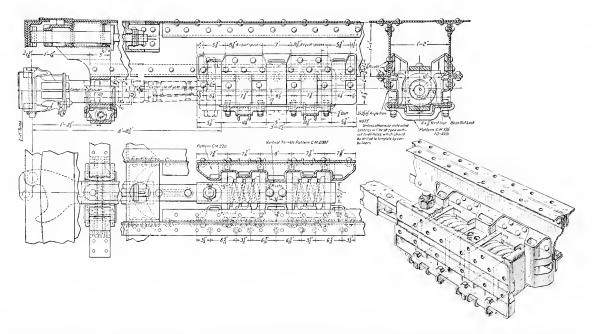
Miner Tandem Draft Gear for Atchison, Topeka & Santa Fe Steel Underframe Passenger Train Cars. W. H. Miner.
